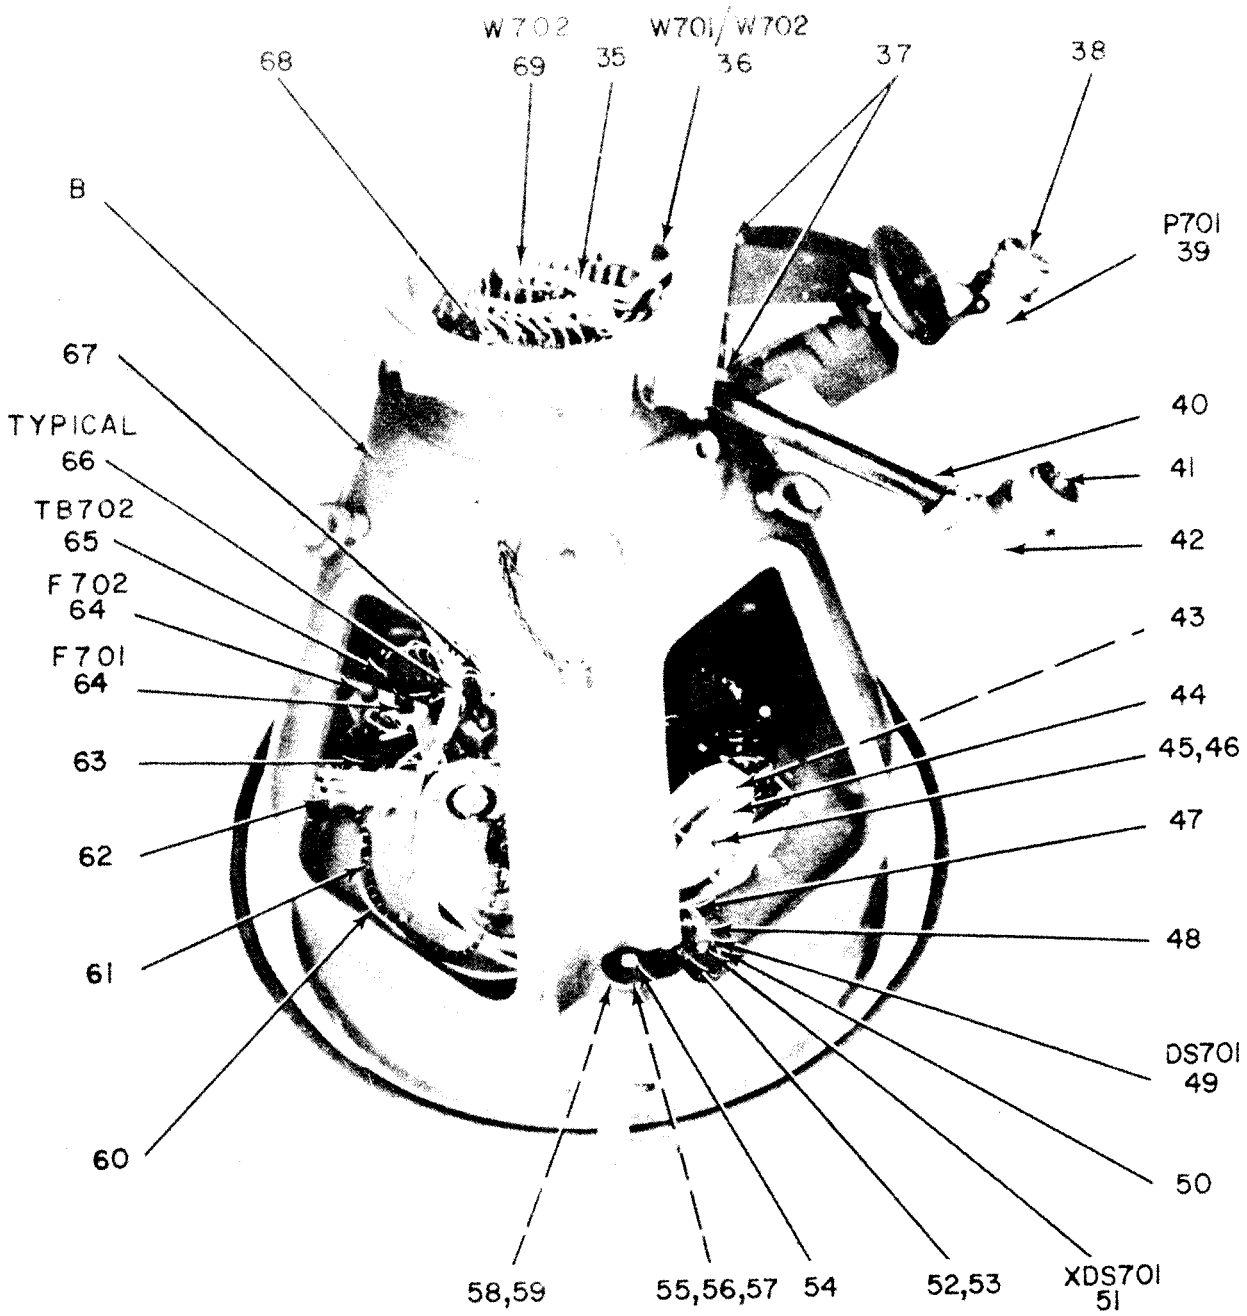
Housing and Frame Assembly (Sheet 1 of 2).
